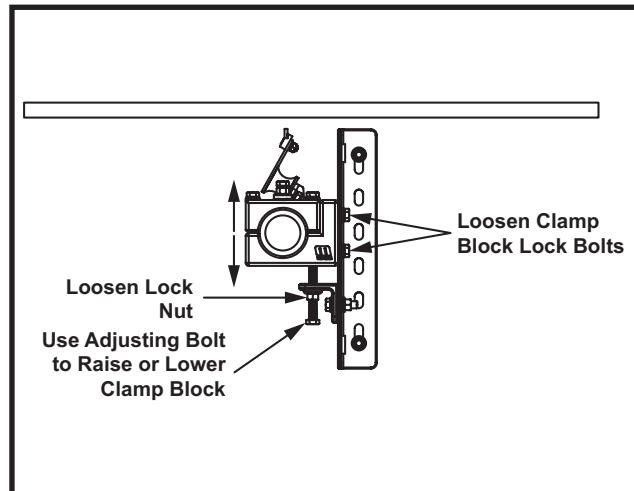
Martin® P2 Secondary Belt Cleaner HD Bolt Tensioner Adjustment Hardware
